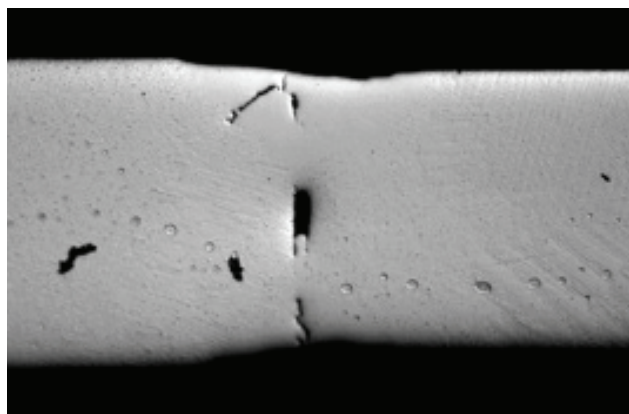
Sample of laser welding by Rofin without filler observed by optical microscope.
